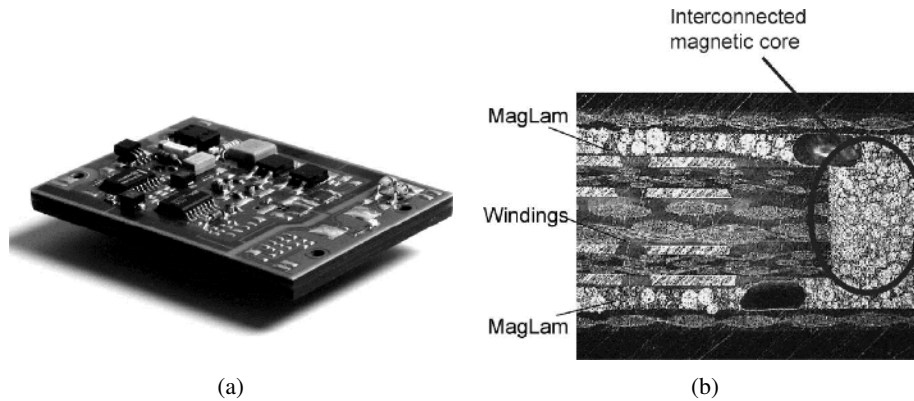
(a) Picture of the prototype using an embedded transformer. The magnetic core is formed using a ferrite polymer compound material (MagLam by Isola). (b) Cross section of the PCB of the prototype. The material becomes soft during the lamination which allows to fill holes to form closed core [34].
